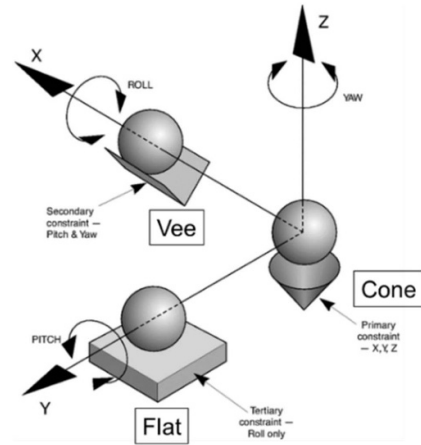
Diagram showing the generic adjustments provided in a standard kinematic mount using the three contact points (i.e., cone, vee and flat) (see [29]).
